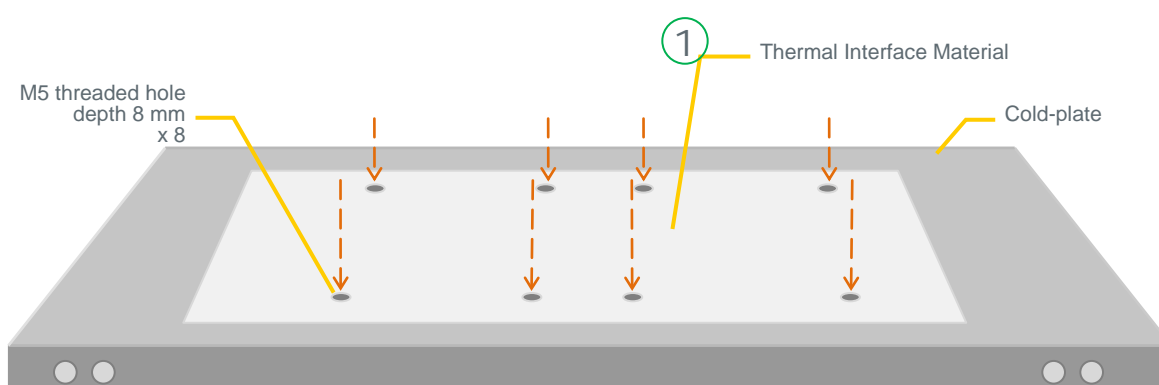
Mounting screws and dimensions for the *EV Power Chargers 3kW HE, IP67
